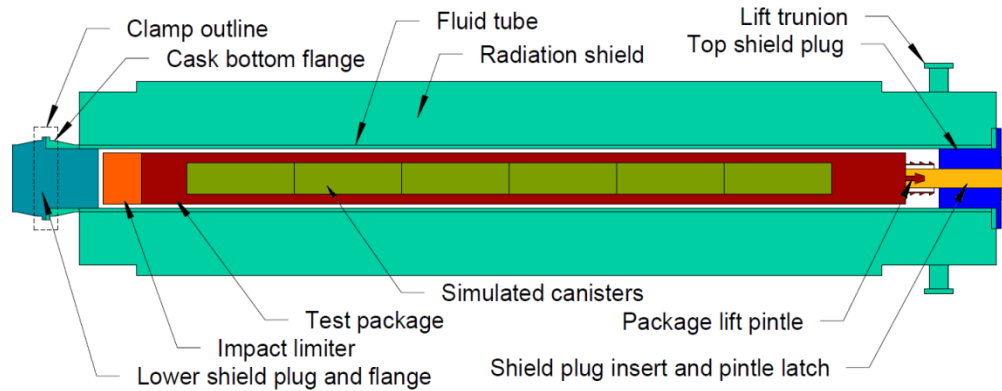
Transfer cask and test package, depicting universal canisters. Calculations show that a waste package containing six universal canisters with three Hanford capsules each would be adequately shielded with 350 mm of steel [1,8]. This calculation also suggests the LWT cask from NAC International would provide adequate shielding for the reference package.
